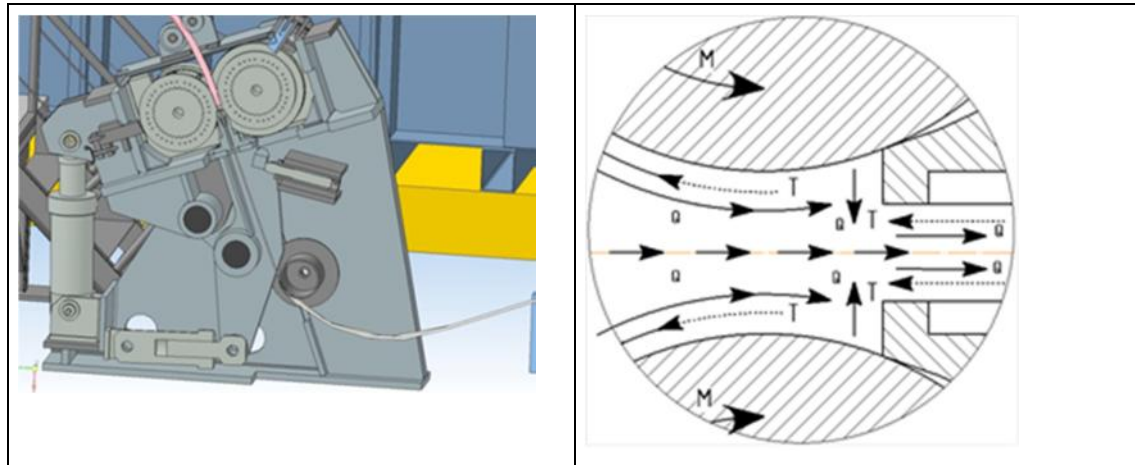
ExtruRoll process. Left: equipment. Right: deformation scheme.
